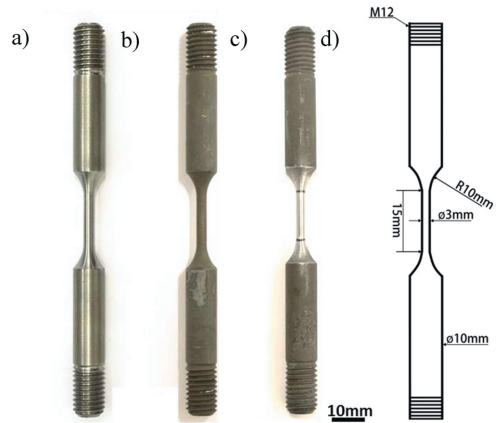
Shape and layout of tensile test samples (a) As-machined (b) After heat treatment (c) After grinding (d) Layout of specimens.
